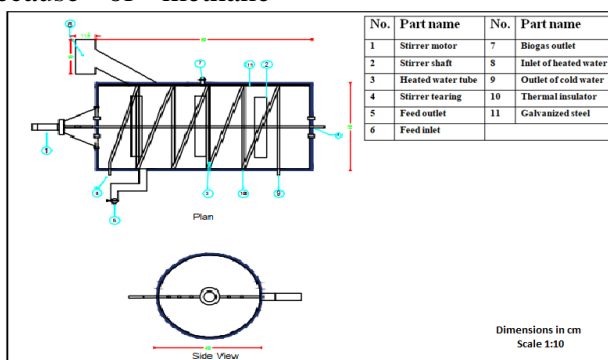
Perspective view of digester supplemented with heated water tube and stirrer motor, DC
